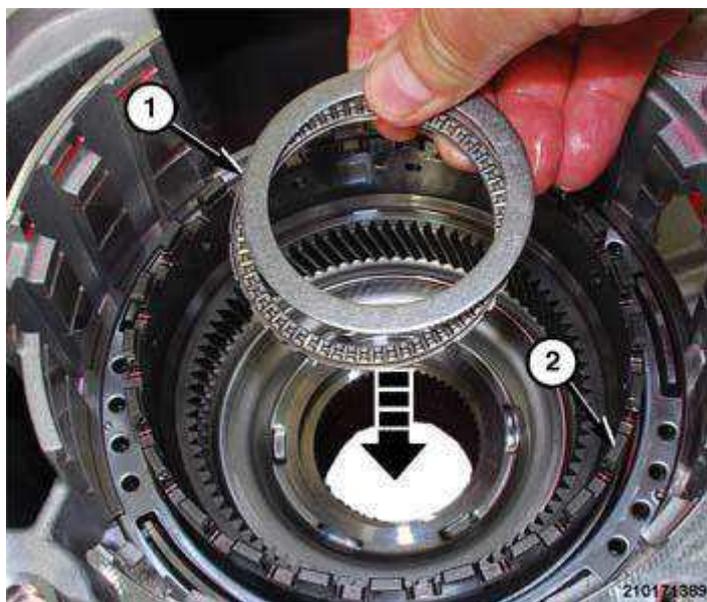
Front Annulus Gear Thrust Bearing And Race
